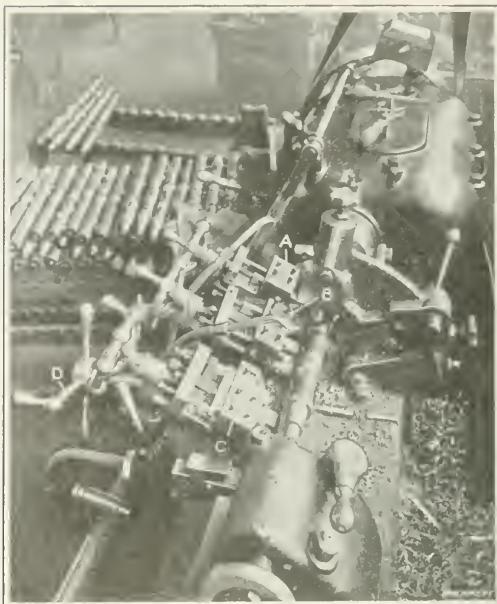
Fitchburg "Lo-Swing" Lathe tooled up for turning Bearing for Steadyrest; rough- and finish-turning Front Bearing; Gear Fit, Threaded End and Collar; and rough-turning between Cams and Pump Eccentric on Cam-shafts
